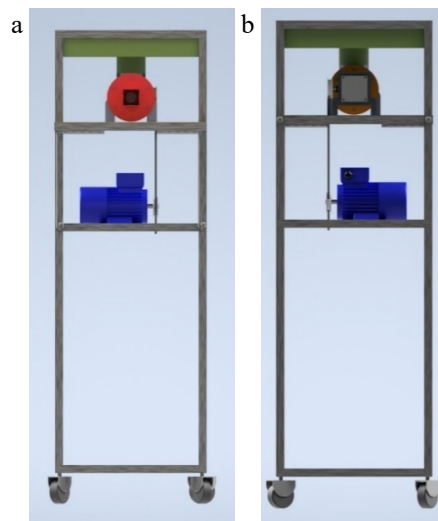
(a) Product Prototype Design Front View; (b) Product Prototype Design Back View
